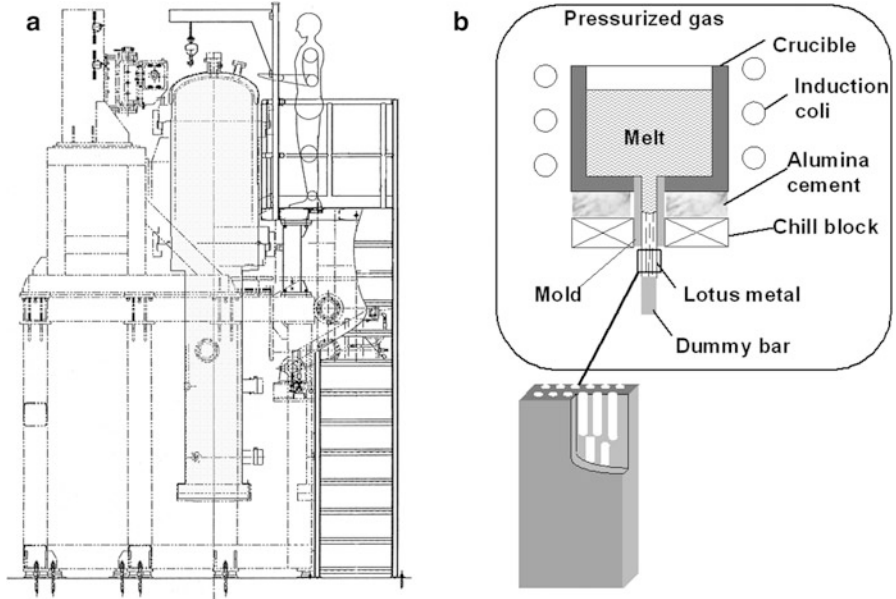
Schematic drawings of fabrication apparatus of lotus metals by the continuous casting technique. (a) Large crucible and induction heating coil are located in the *upper part* of the chamber, while the mold with cooling part and movable mechanism of the solidified metal rod with pinch roll are installed in the *bottom part* of the chamber. (b) Schematic drawing of the details inside the chamber. The dummy bar is connected together with the melt at the mold. Reproduced from Nakajima H 2007 Fabrication, properties and application of porous metals with directional pores. Prog. Mater. Sci. 52, 1091–1173, with permission from Elsevier
